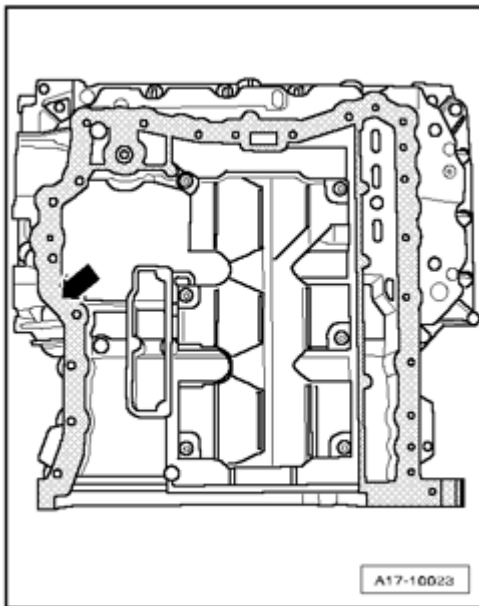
Applying Sealant Bead On Clean Sealing Surface Of Upper Section Of Oil Pan
